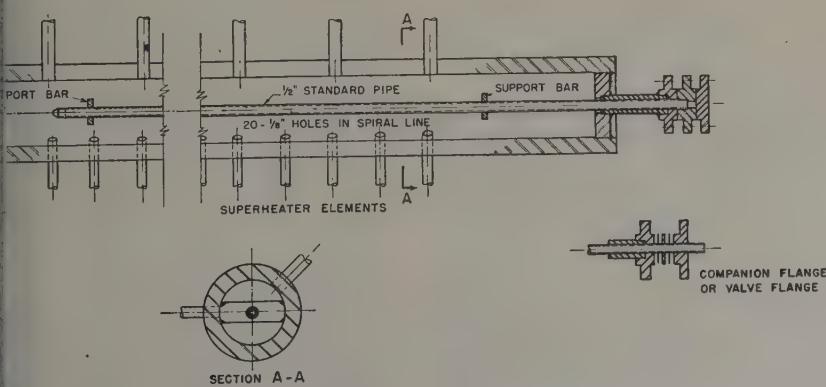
Sampling Nozzle for Use in Inlet Header of Superheater.
